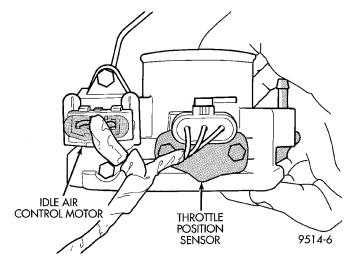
Throttle Position Sensor and Idle Air Control Motor—DOHC
